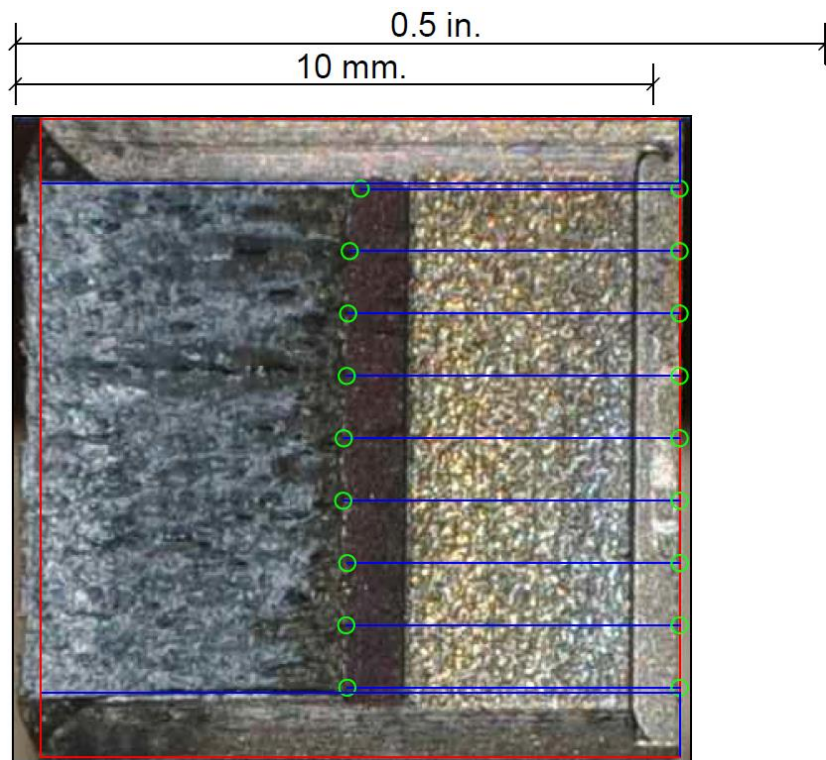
Specimen R2' Fracture Surface
